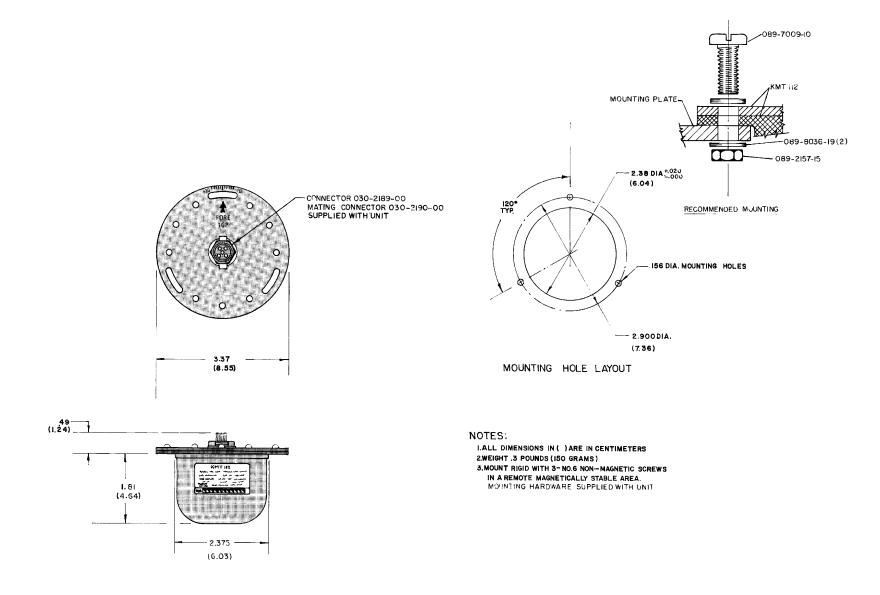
KG 102/102A INSTALLATION DRAWING (Dwg. No. 155-05118-0000, R-AA)
